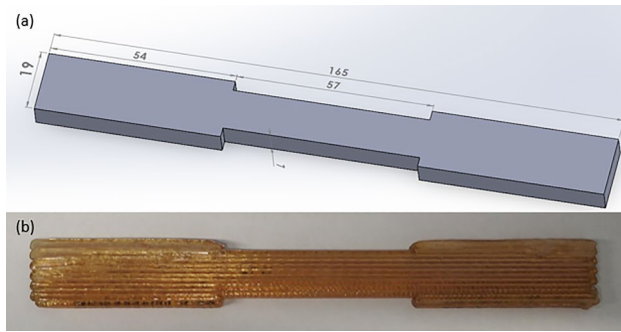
(a) Dog bone samples' dimensions; (b) Sample ULTEM 1010-8
